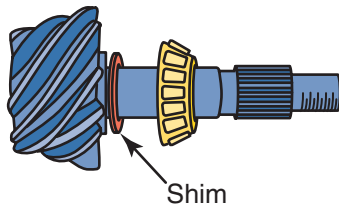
The typical placement of a pinion gear depth shim.
